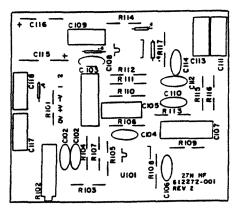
Typical Circuit Board Layout - Harmonic Filter Module
